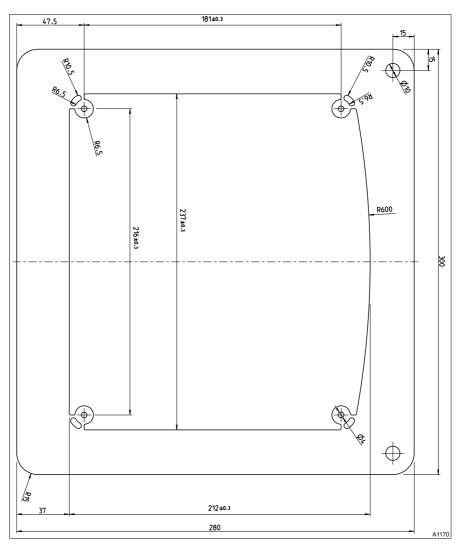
The drawing is not true to scale and will not be revised as part of these operating instructions. The drawing is for information only.
